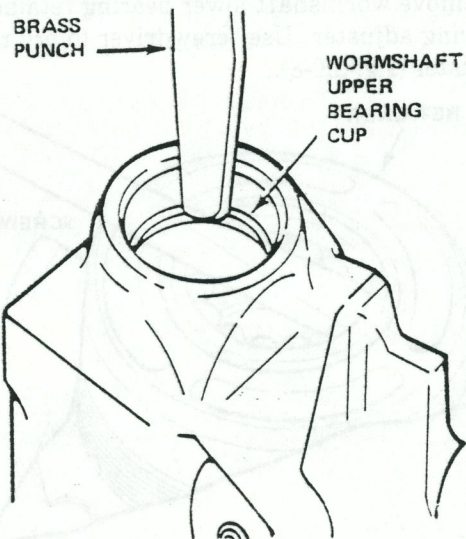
K-13 Removing Wormshaft Upper Bearing Cup
